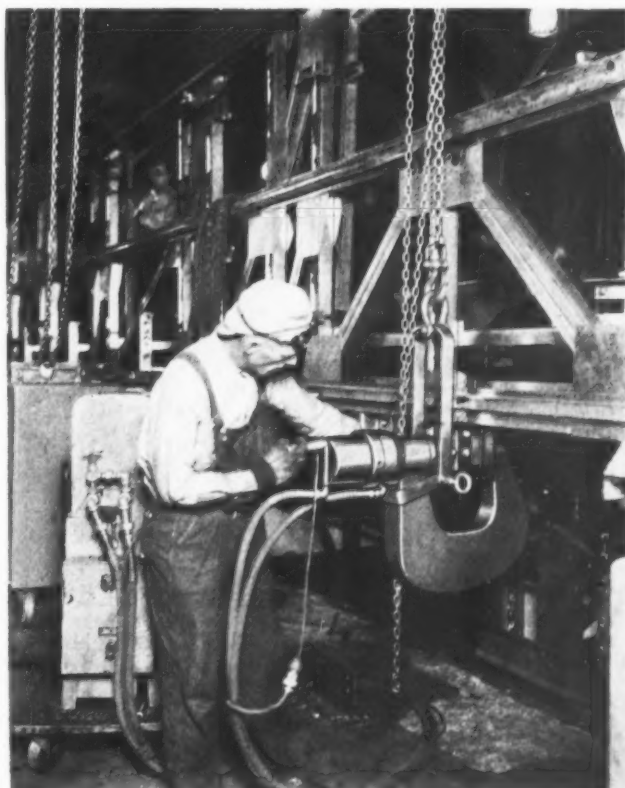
Driving Rivets Hydraulically with a 50-ton Riveter in the Construction of a Streamline Train
